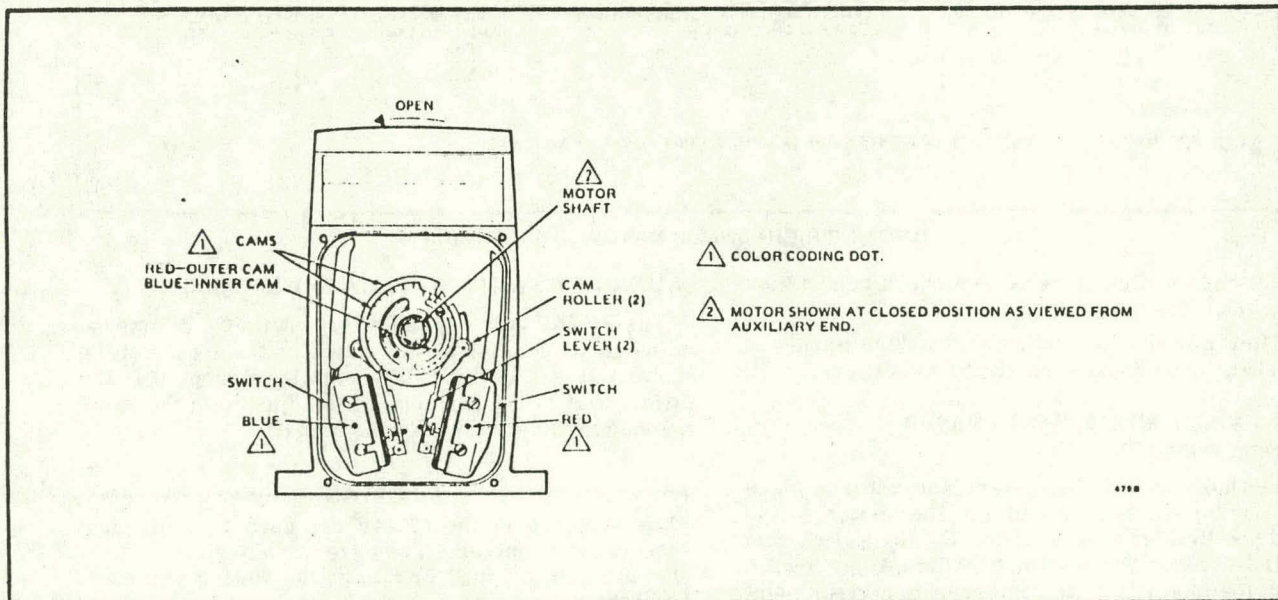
LOCATION OF INTERNAL AUXILIARY SWITCHES AND SWITCH CAMS IN M644D MODUTROL MOTOR.
